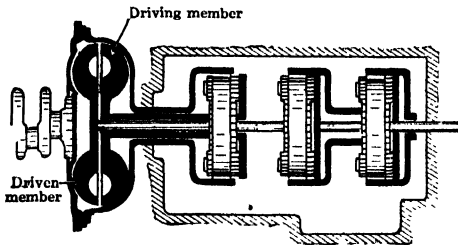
Fluid flywheel with planetary gear sets and hydraulic controls.
